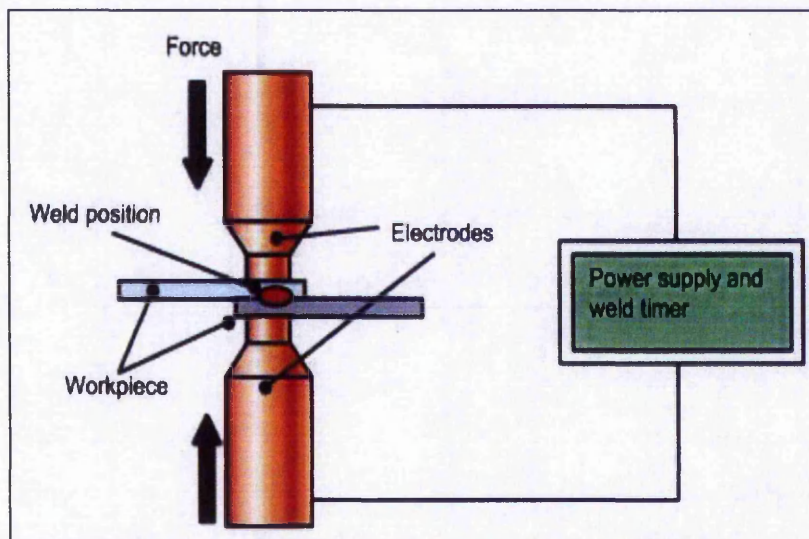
Schematic diagram of the spot welding process
